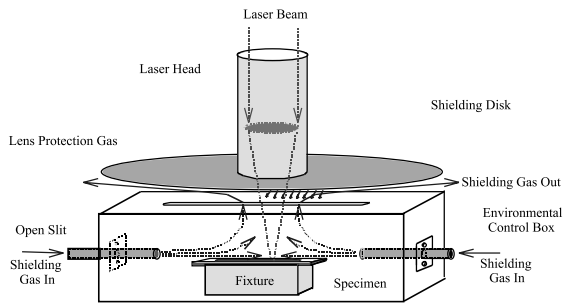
Setup of the ECB for the laser-welding system.
